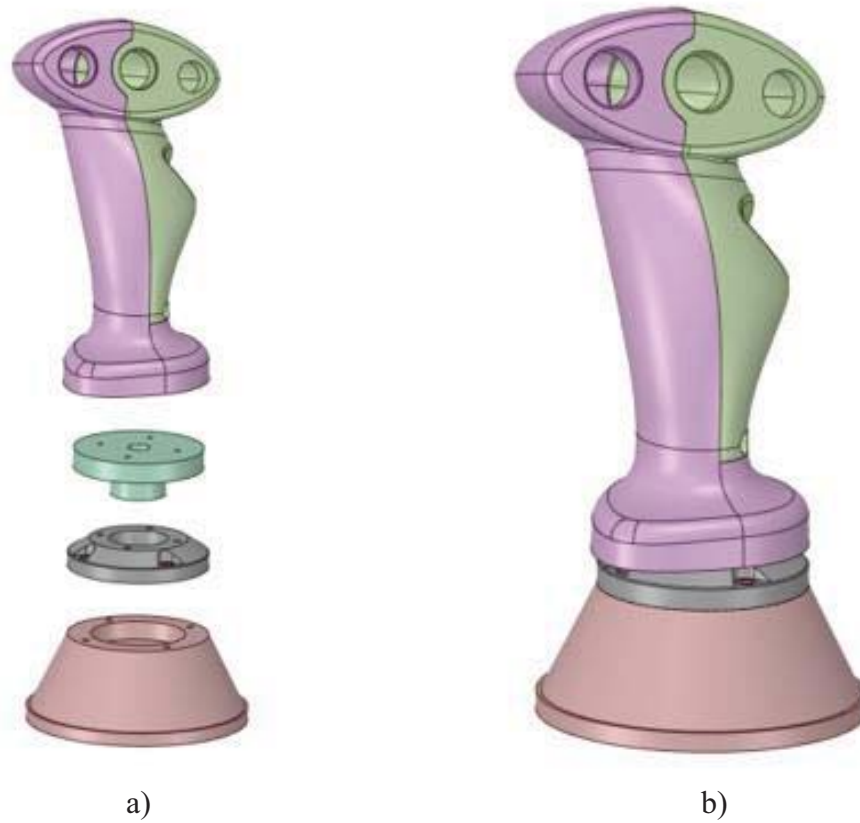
Installation of the isolator: a) Exploded view; b) assembly view
